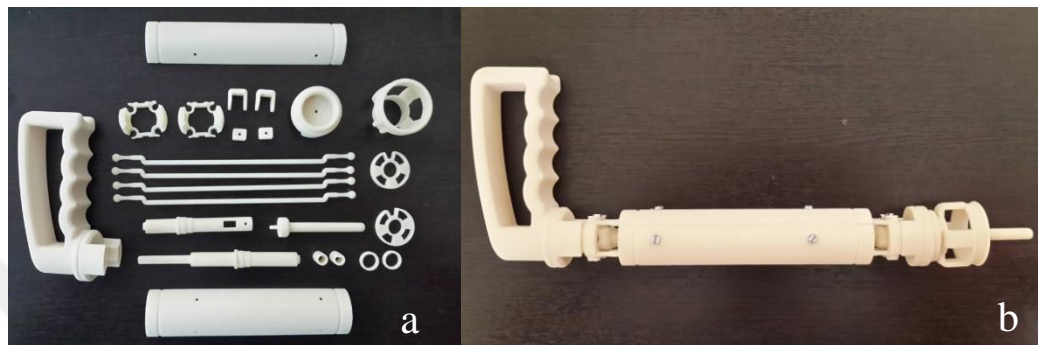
SLS Manufactured parts (a) and assembly performed system (b).
